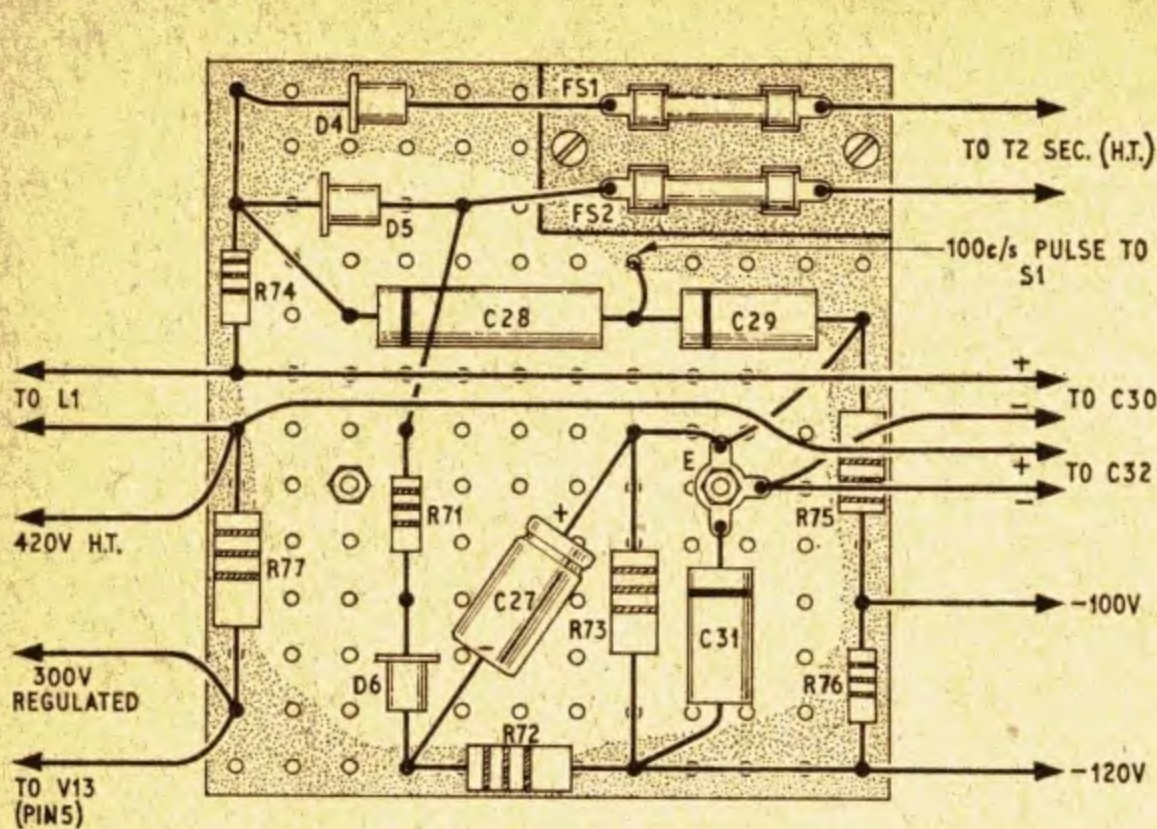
Main h.t. unit tag board. This is mounted on the underside of the main chassis
